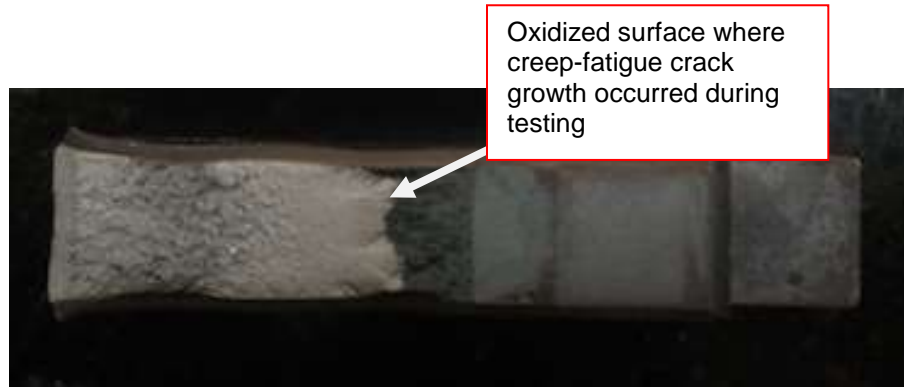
Picture of a tested creep-fatigue crack growth specimen used for machining the oxidation samples.
